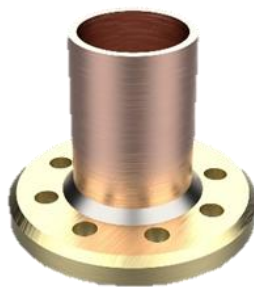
Three-dimensional geometric model of the copper tube-brass flange welded assembly (SolidWorks)
